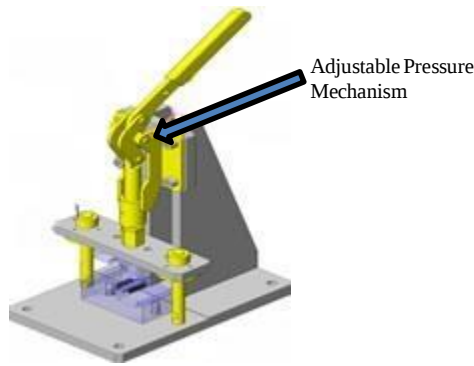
Modification Holding Pressure Level On The Pressing Jig.
